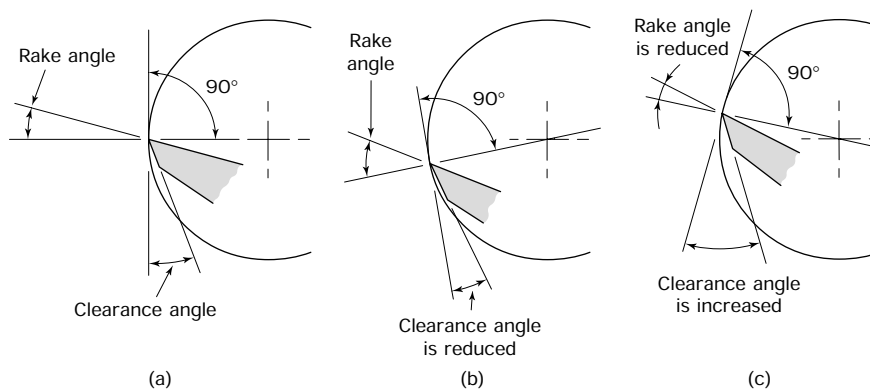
Effect of tool height on boring tool angles: (a) tool set correctly on centre height; (b) tool set below centre height; (c) tool set above centre height
